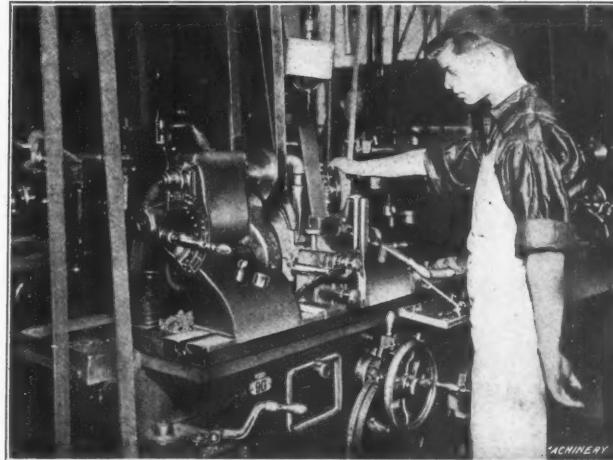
Grinding Poppet Valve Stems in a Landis Plain Grinding Machine
